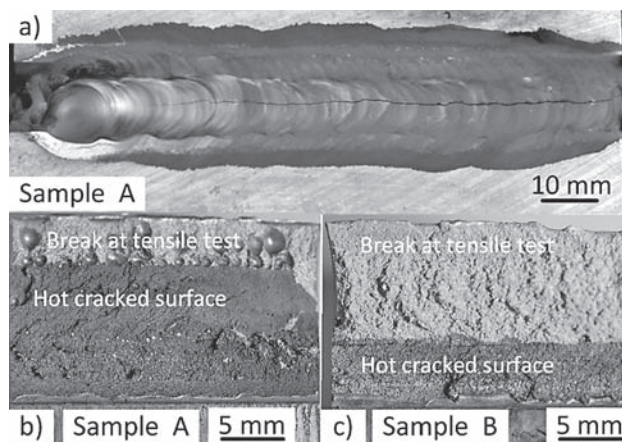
Hot cracks in weld: a) and b) sample A and c) sample B.
